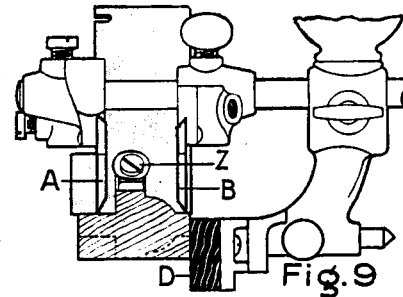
SASH PLANE—The Sash Cutter is similar to the tool used for cutting the tongue on matched boards, as it has a Stop (Z) which can be adjusted to regulate the depth of the cut. One side of the moulding is cut first, the work is then reversed and the operation repeated on the other side. Fence (D) is used as in Matching. Spurs not used.
